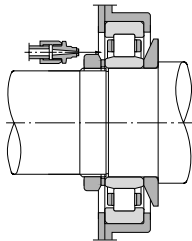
Spherical roller bearing with full-pack solid grease (Standard for spherical roller bearings)
